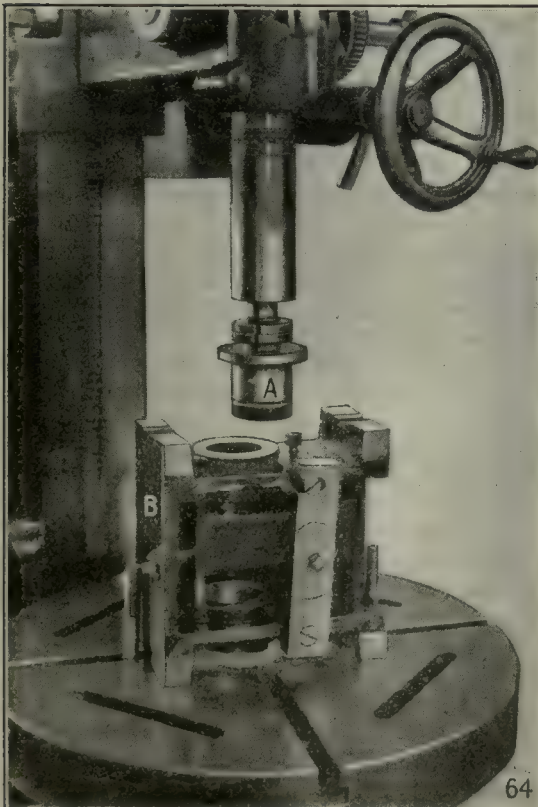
END MILLING TRUNNIONS ON EXTRACTOR SIDES. FIG. 65. TURRET LATHE SET-UP FOR OPERATIONS ON FIRING LOCK CASE. FIG. 66. INDEXING DEVICE FOR FINISH SLOTTING OF SECTORS OF FIRING LOCK CASE
